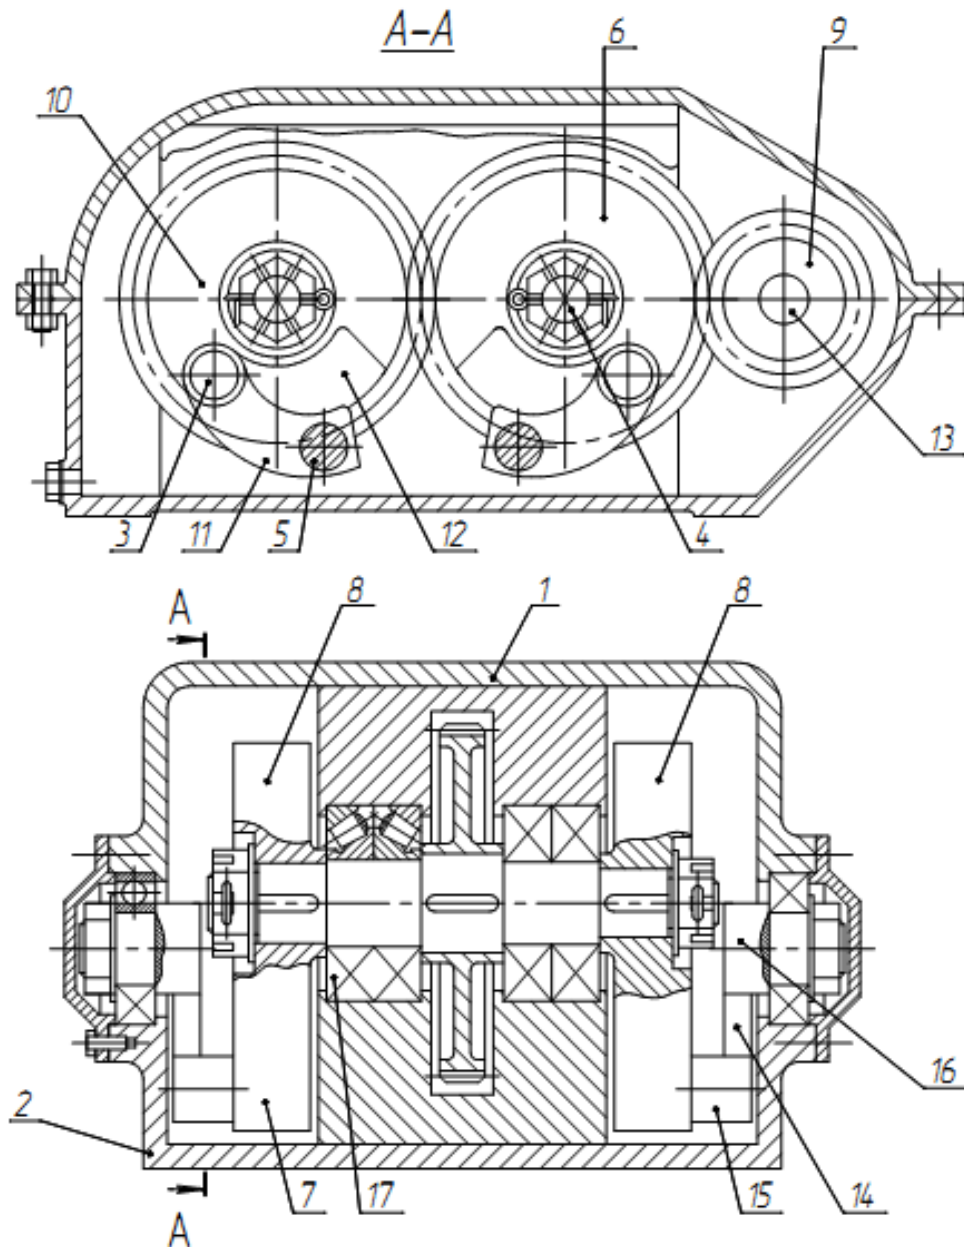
Single-direction vibrating compactor: 1 – frame; 2 – platform vibrator; 3, 4, 5 – shafts; 6, 7 – synchronizing device gears; 8 – balance weight; 9 – gear; 10 – fixed element of balance weight; 11 – moving element of balance weight; 12 – notch; 13, 15, 16 – axis; 14 – lever; 17 – bearings
